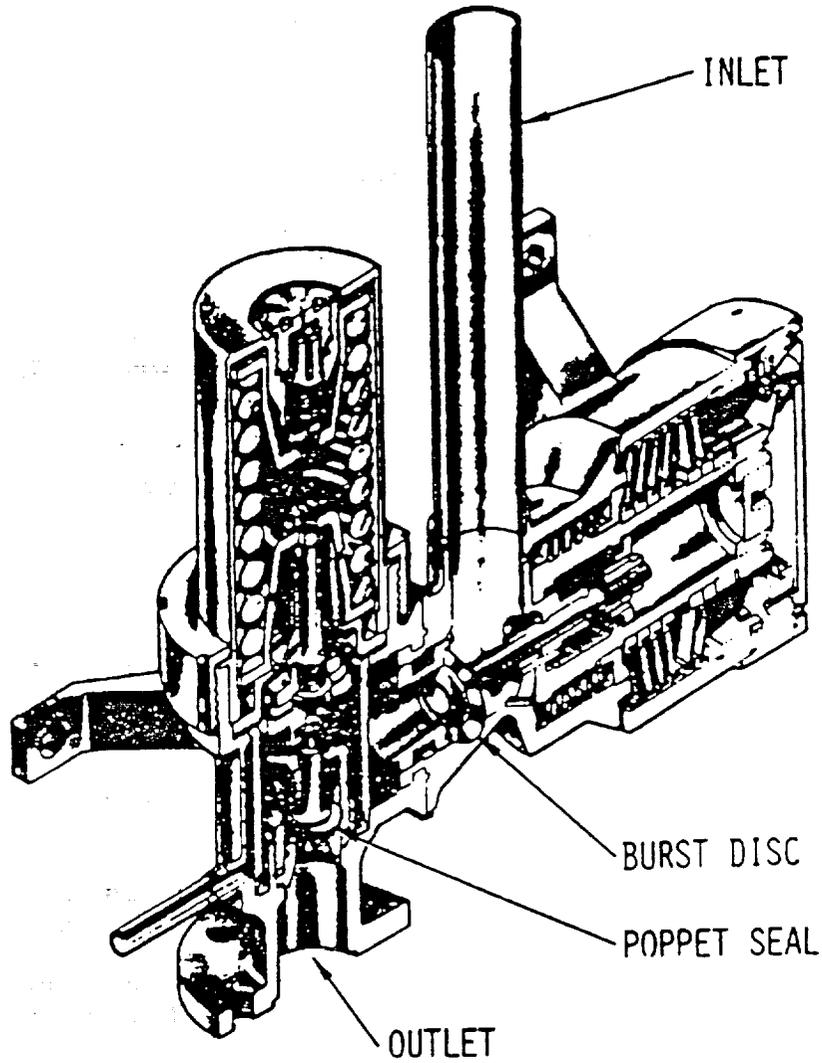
PRESSURE RELIEF VALVE ASSEMBLY
